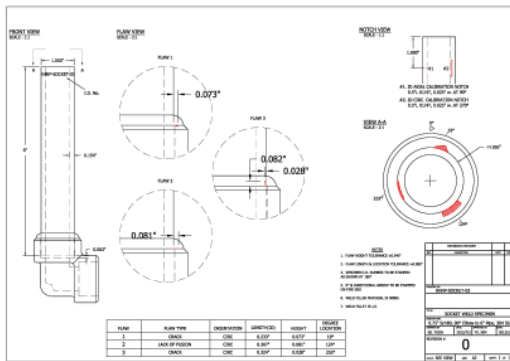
Design drawing of 3/4" flawed socket weld specimen
